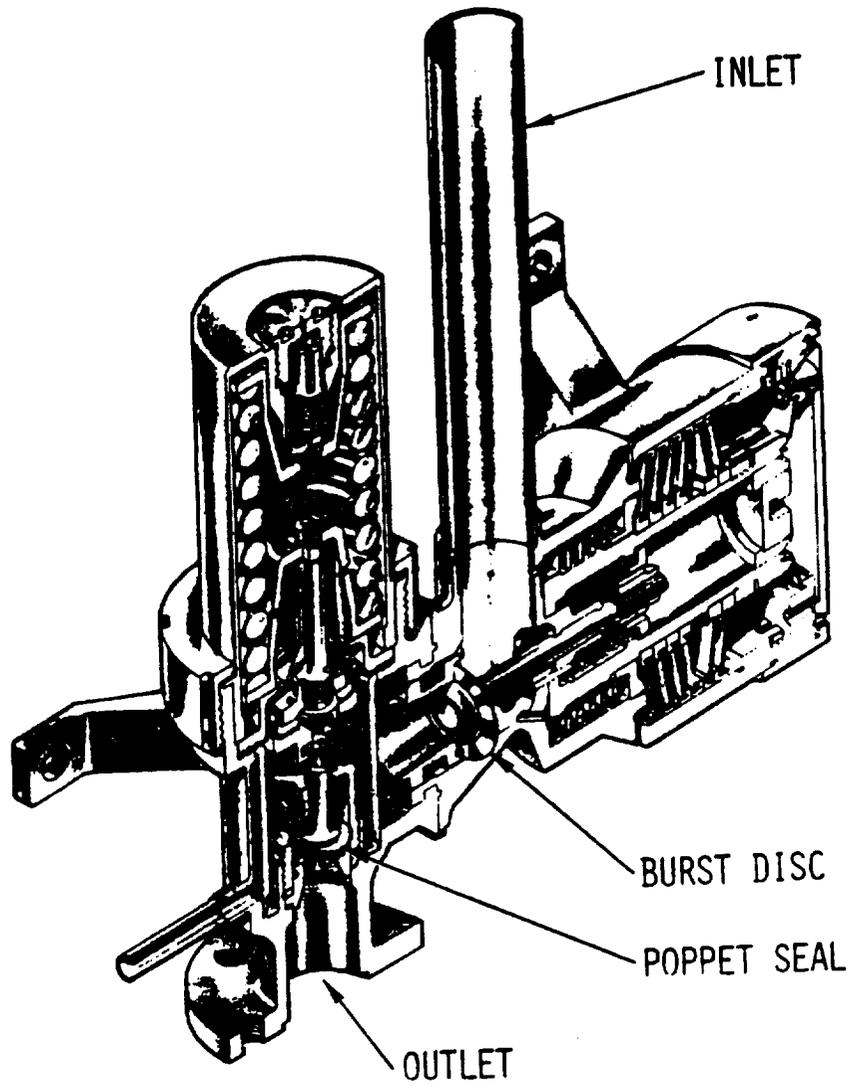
PRESSURE RELIEF VALVE ASSEMBLY
